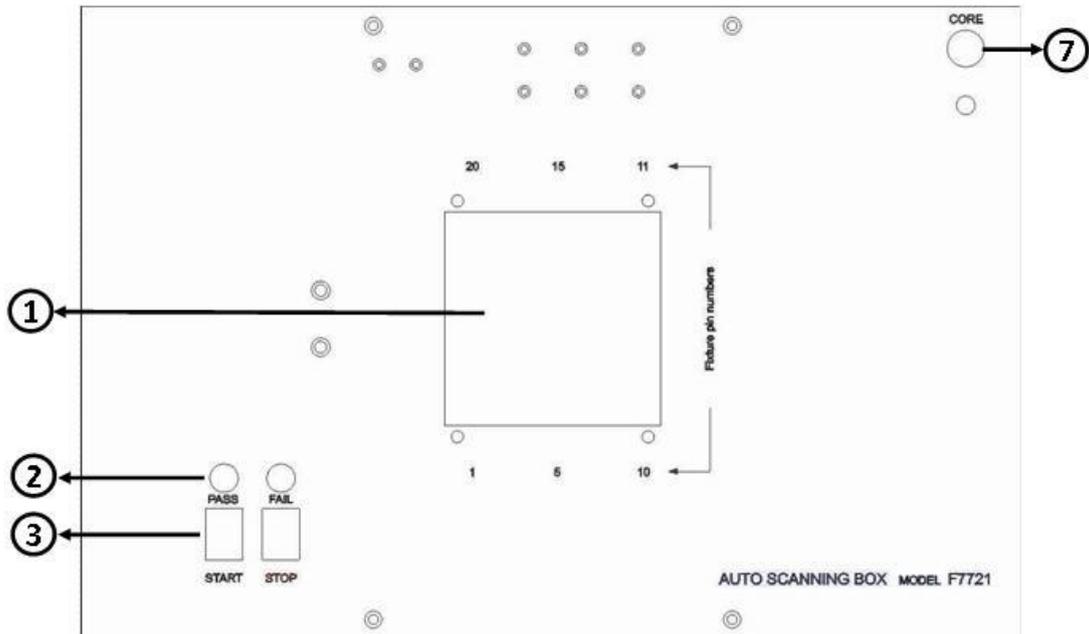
F57721 Transformer Tester Fixture Overlook
